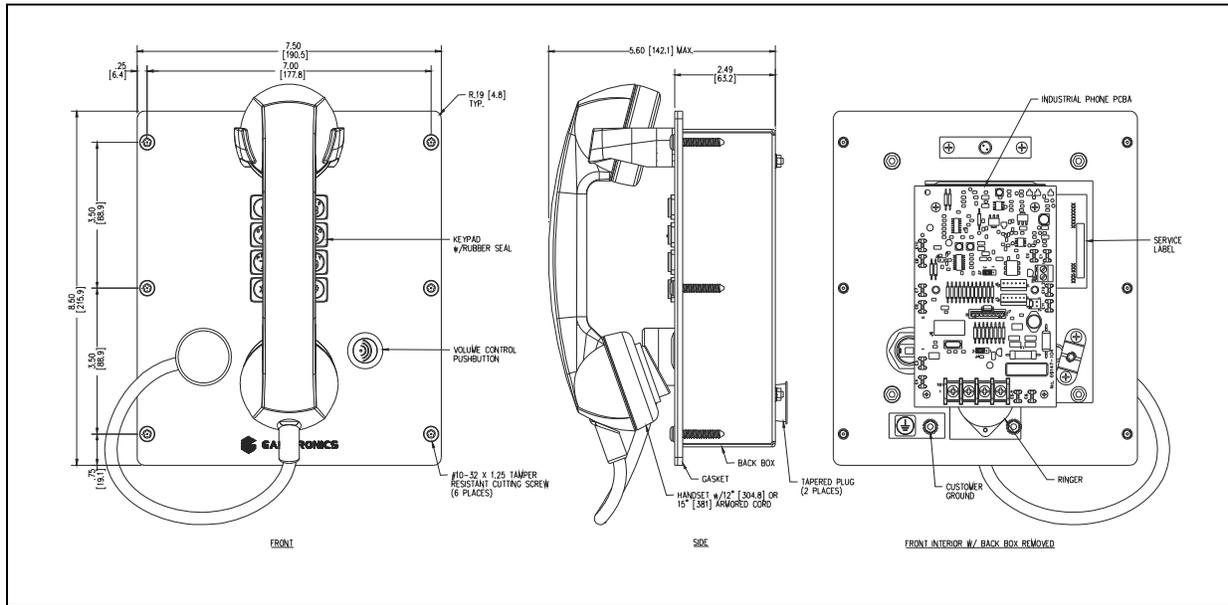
Model 276-002BH/-002BHAC Outline Drawing
